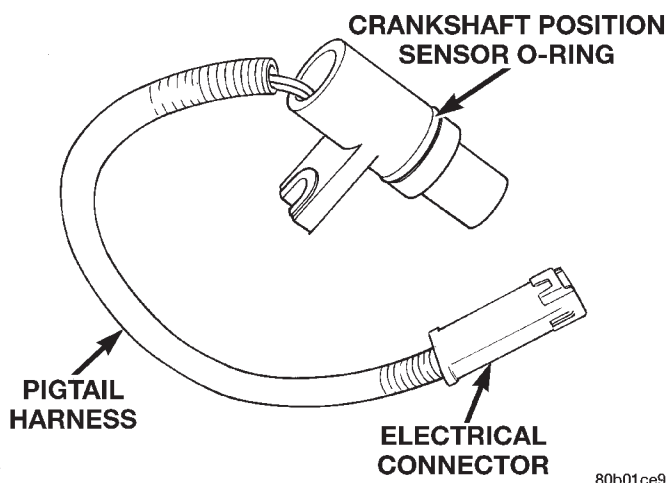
Sensor O-Ring—8.0L V-10 Engine
